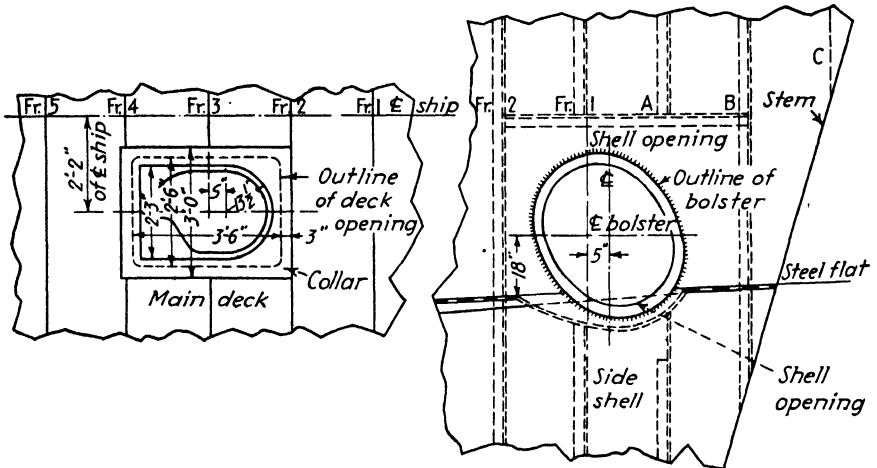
Opening cut in deck and shell ready for installation of hawsepipe.
